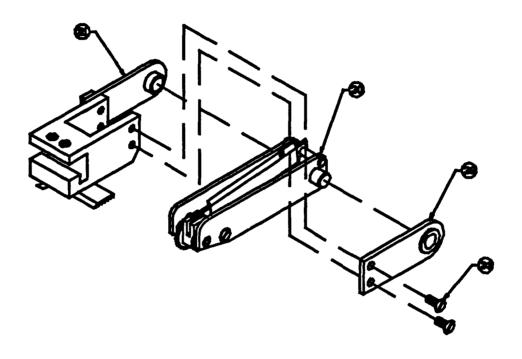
Redesigned Clupicker-- Final Assembly.
